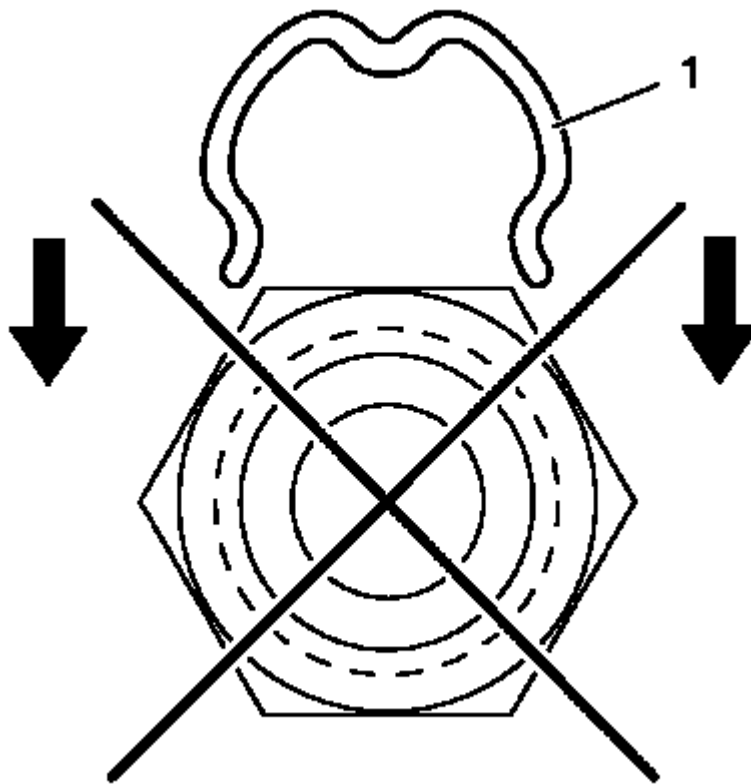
Automatic Transmission Oil Cooler Fitting Retaining Ring Caution
